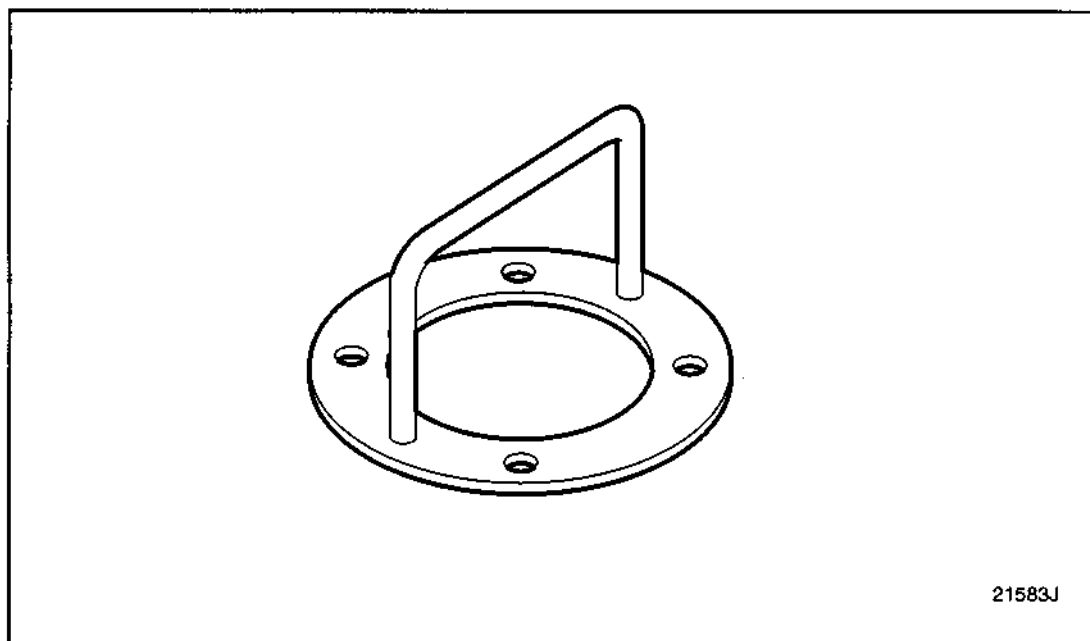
Gear Case To Block Alignment Tool,J 35651
